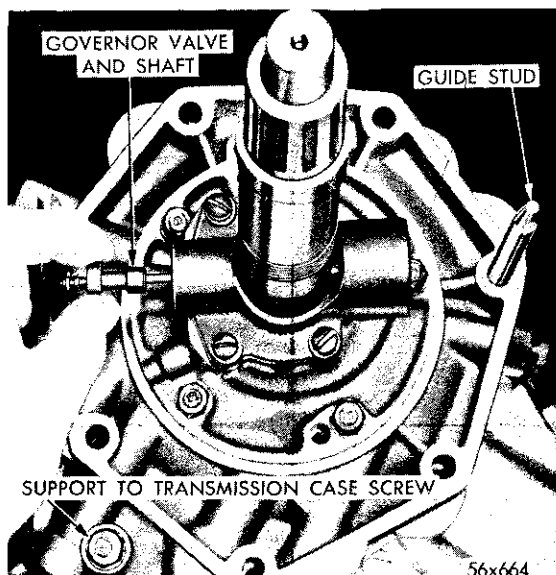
Removal and Installation of Governor Valve Shaft and Valve
